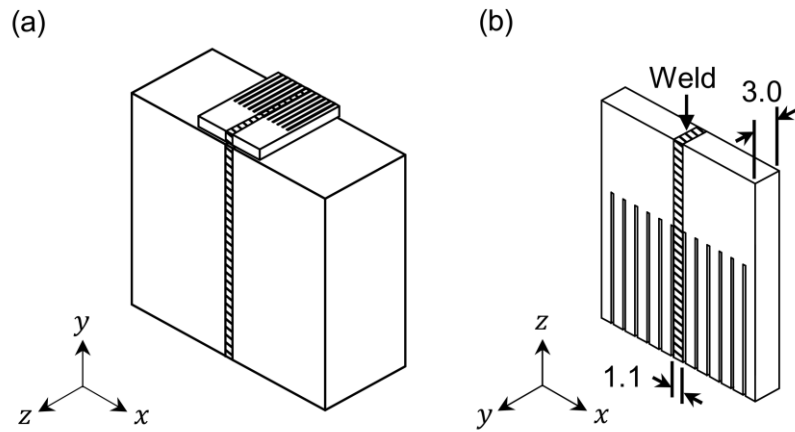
(a) Diagram showing the location the toothcomb specimen was machined from in specimen EBW4 and (b) the geometry of the toothcomb specimen
